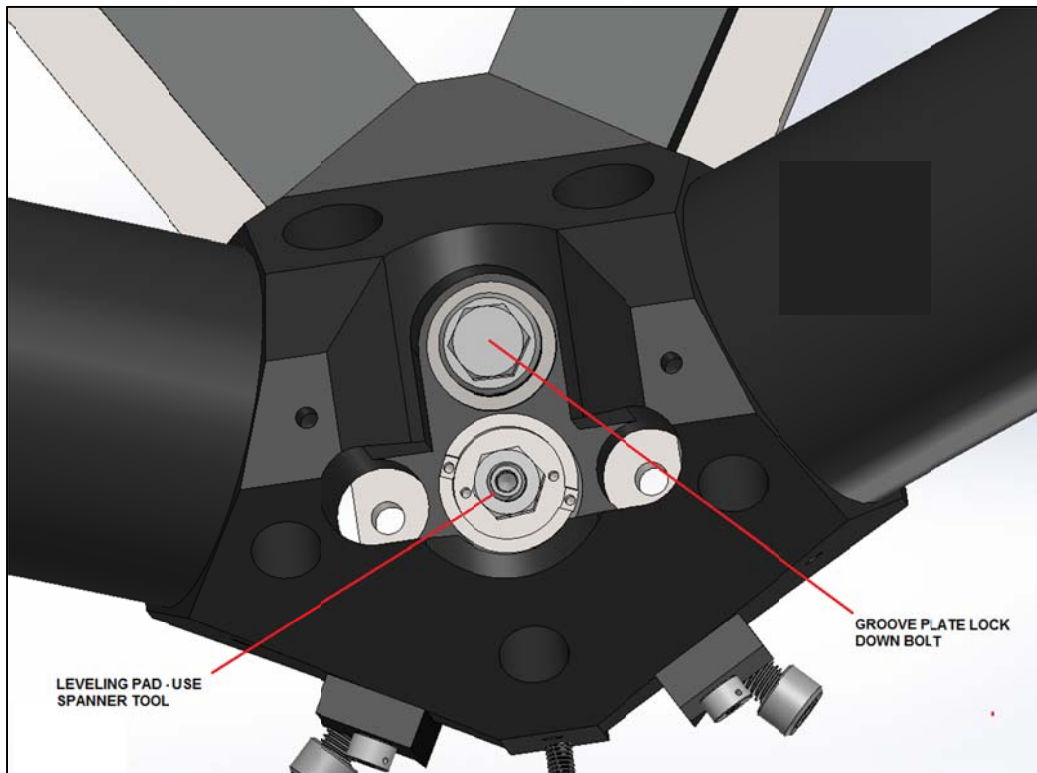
On axis tip/tilt/piston adjustments and hardware. Image shows the come-along eye removed for access to all hardware. Lock nut on leveling pad is drilled and lock down bolt is drilled head for safety wire after final alignment.
